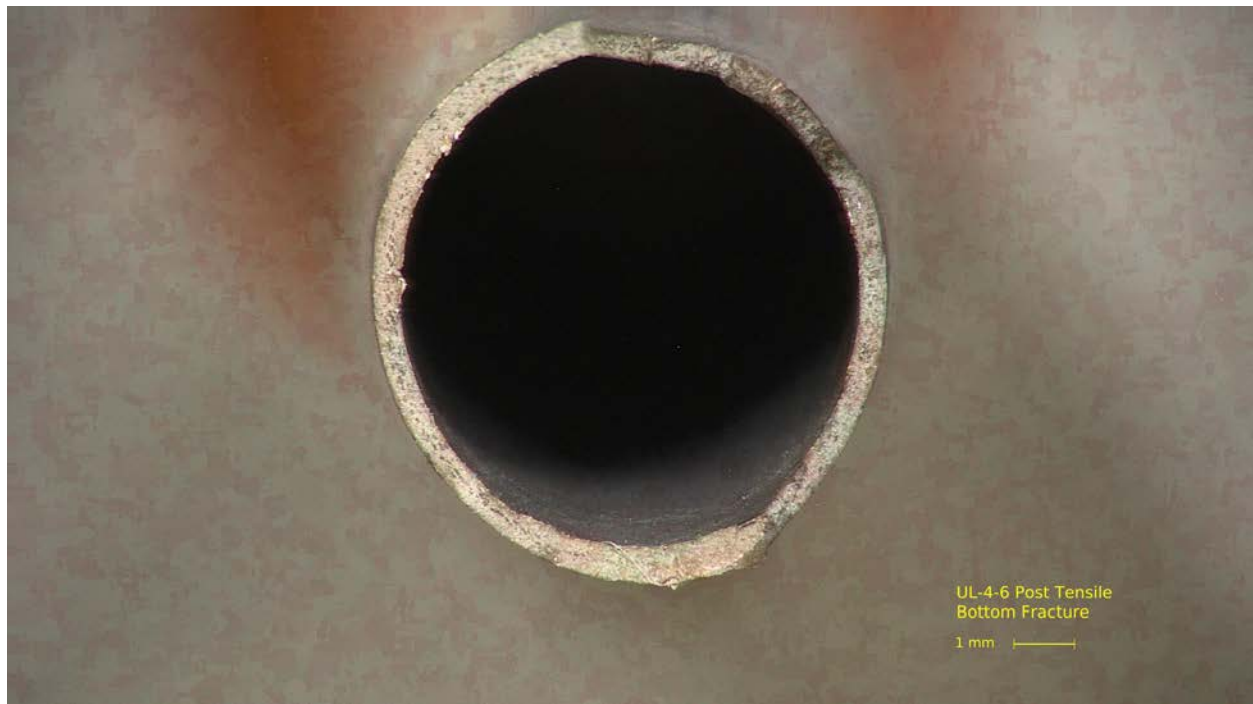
Post-Tensile Image Bottom Fracture for UL-4-6
